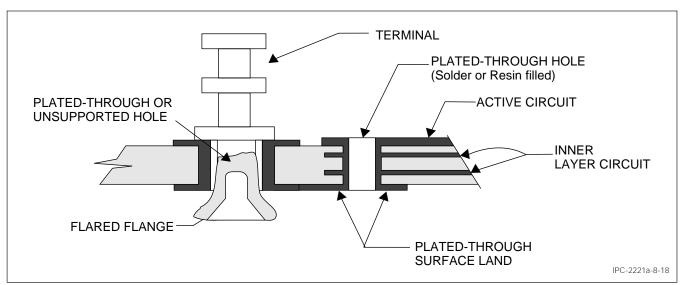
Dual Hole Configuration for Interfacial and Interlayer Terminal Mountings
